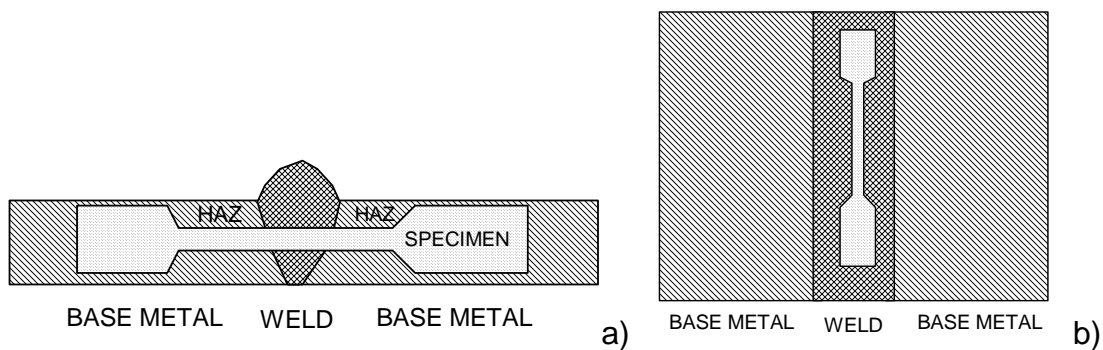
Schematic of tensile specimens from a) transverse section of weld joints and b) all weld specimen
